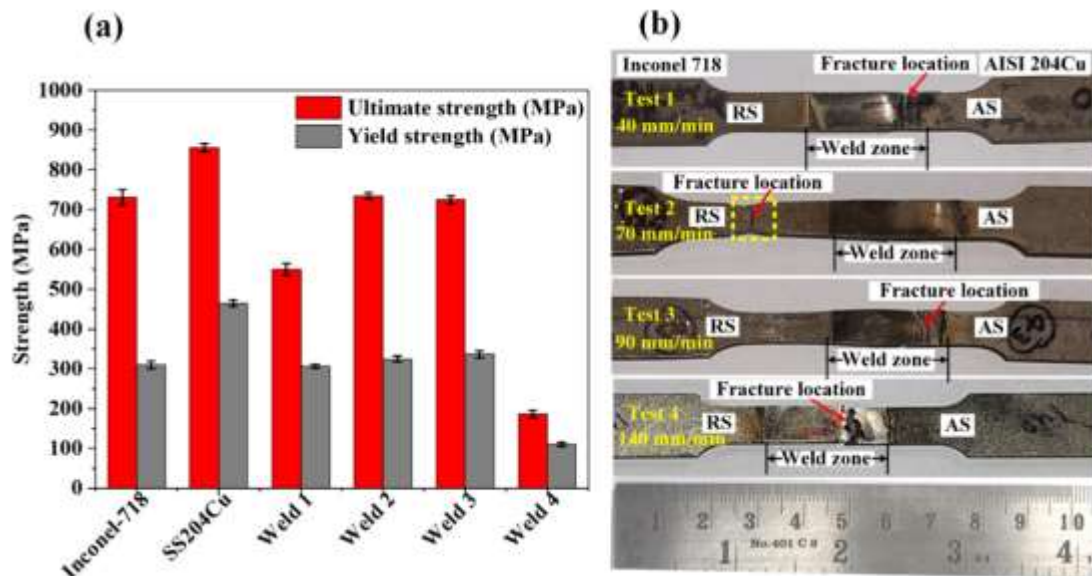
(a) UTS and 0.2% YS of the base material and welded sample, and (b) top view of the fractured tensile sample.
